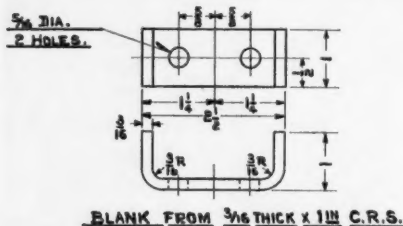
Drawing of work-piece as formed by the die illustrated in Fig. 4.
